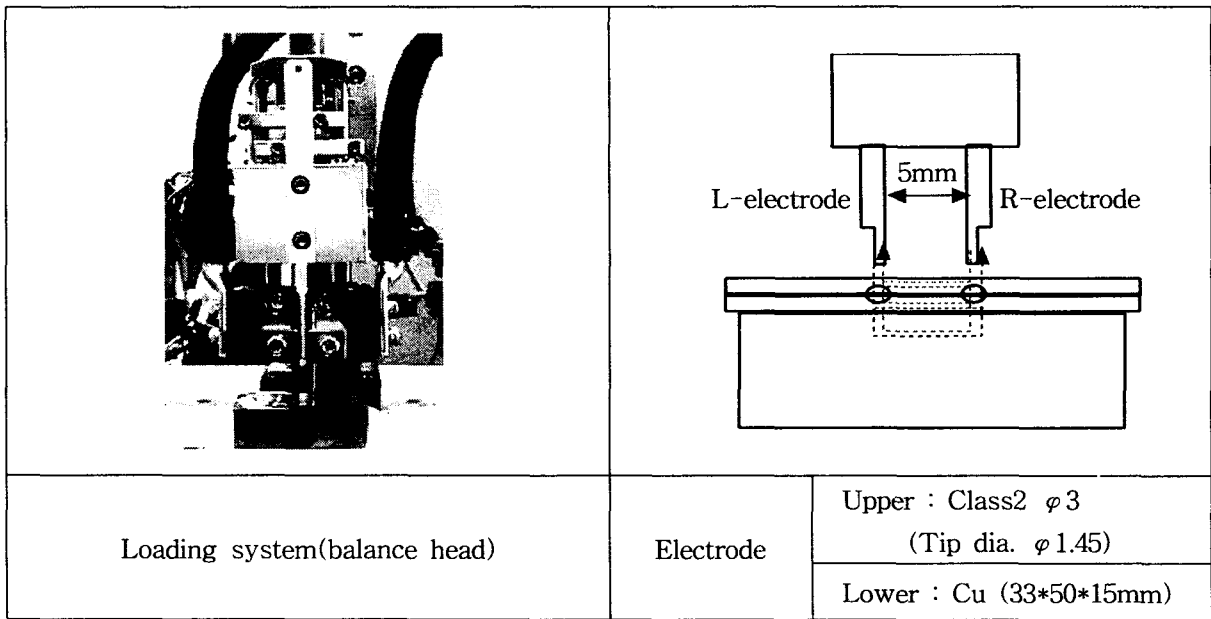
Appearance of welding head and schematic diagram of electrode
